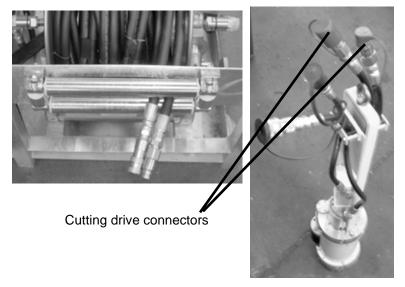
The cutting drive hoses are on the right hose spool at the back of the control station. They connect to the smaller pair of connectors on the cutting machine.
